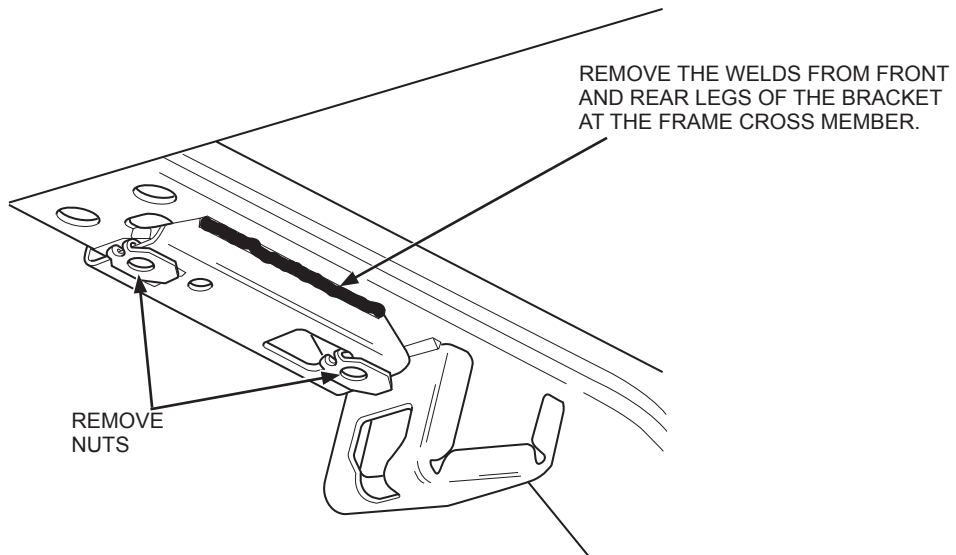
REMOVE NUTS SHOWN AND REMOVE WELDS SHOWN TO REPLACE DAMAGED BRACKET
